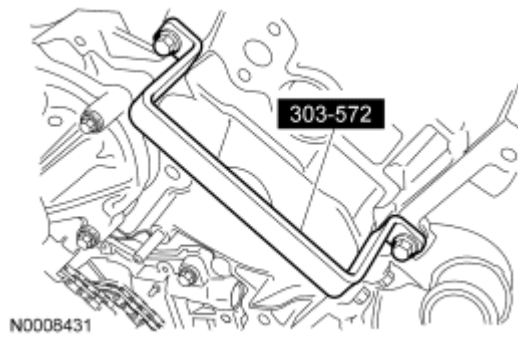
Identifying Special Tool (303-572) LH Cylinder Head
